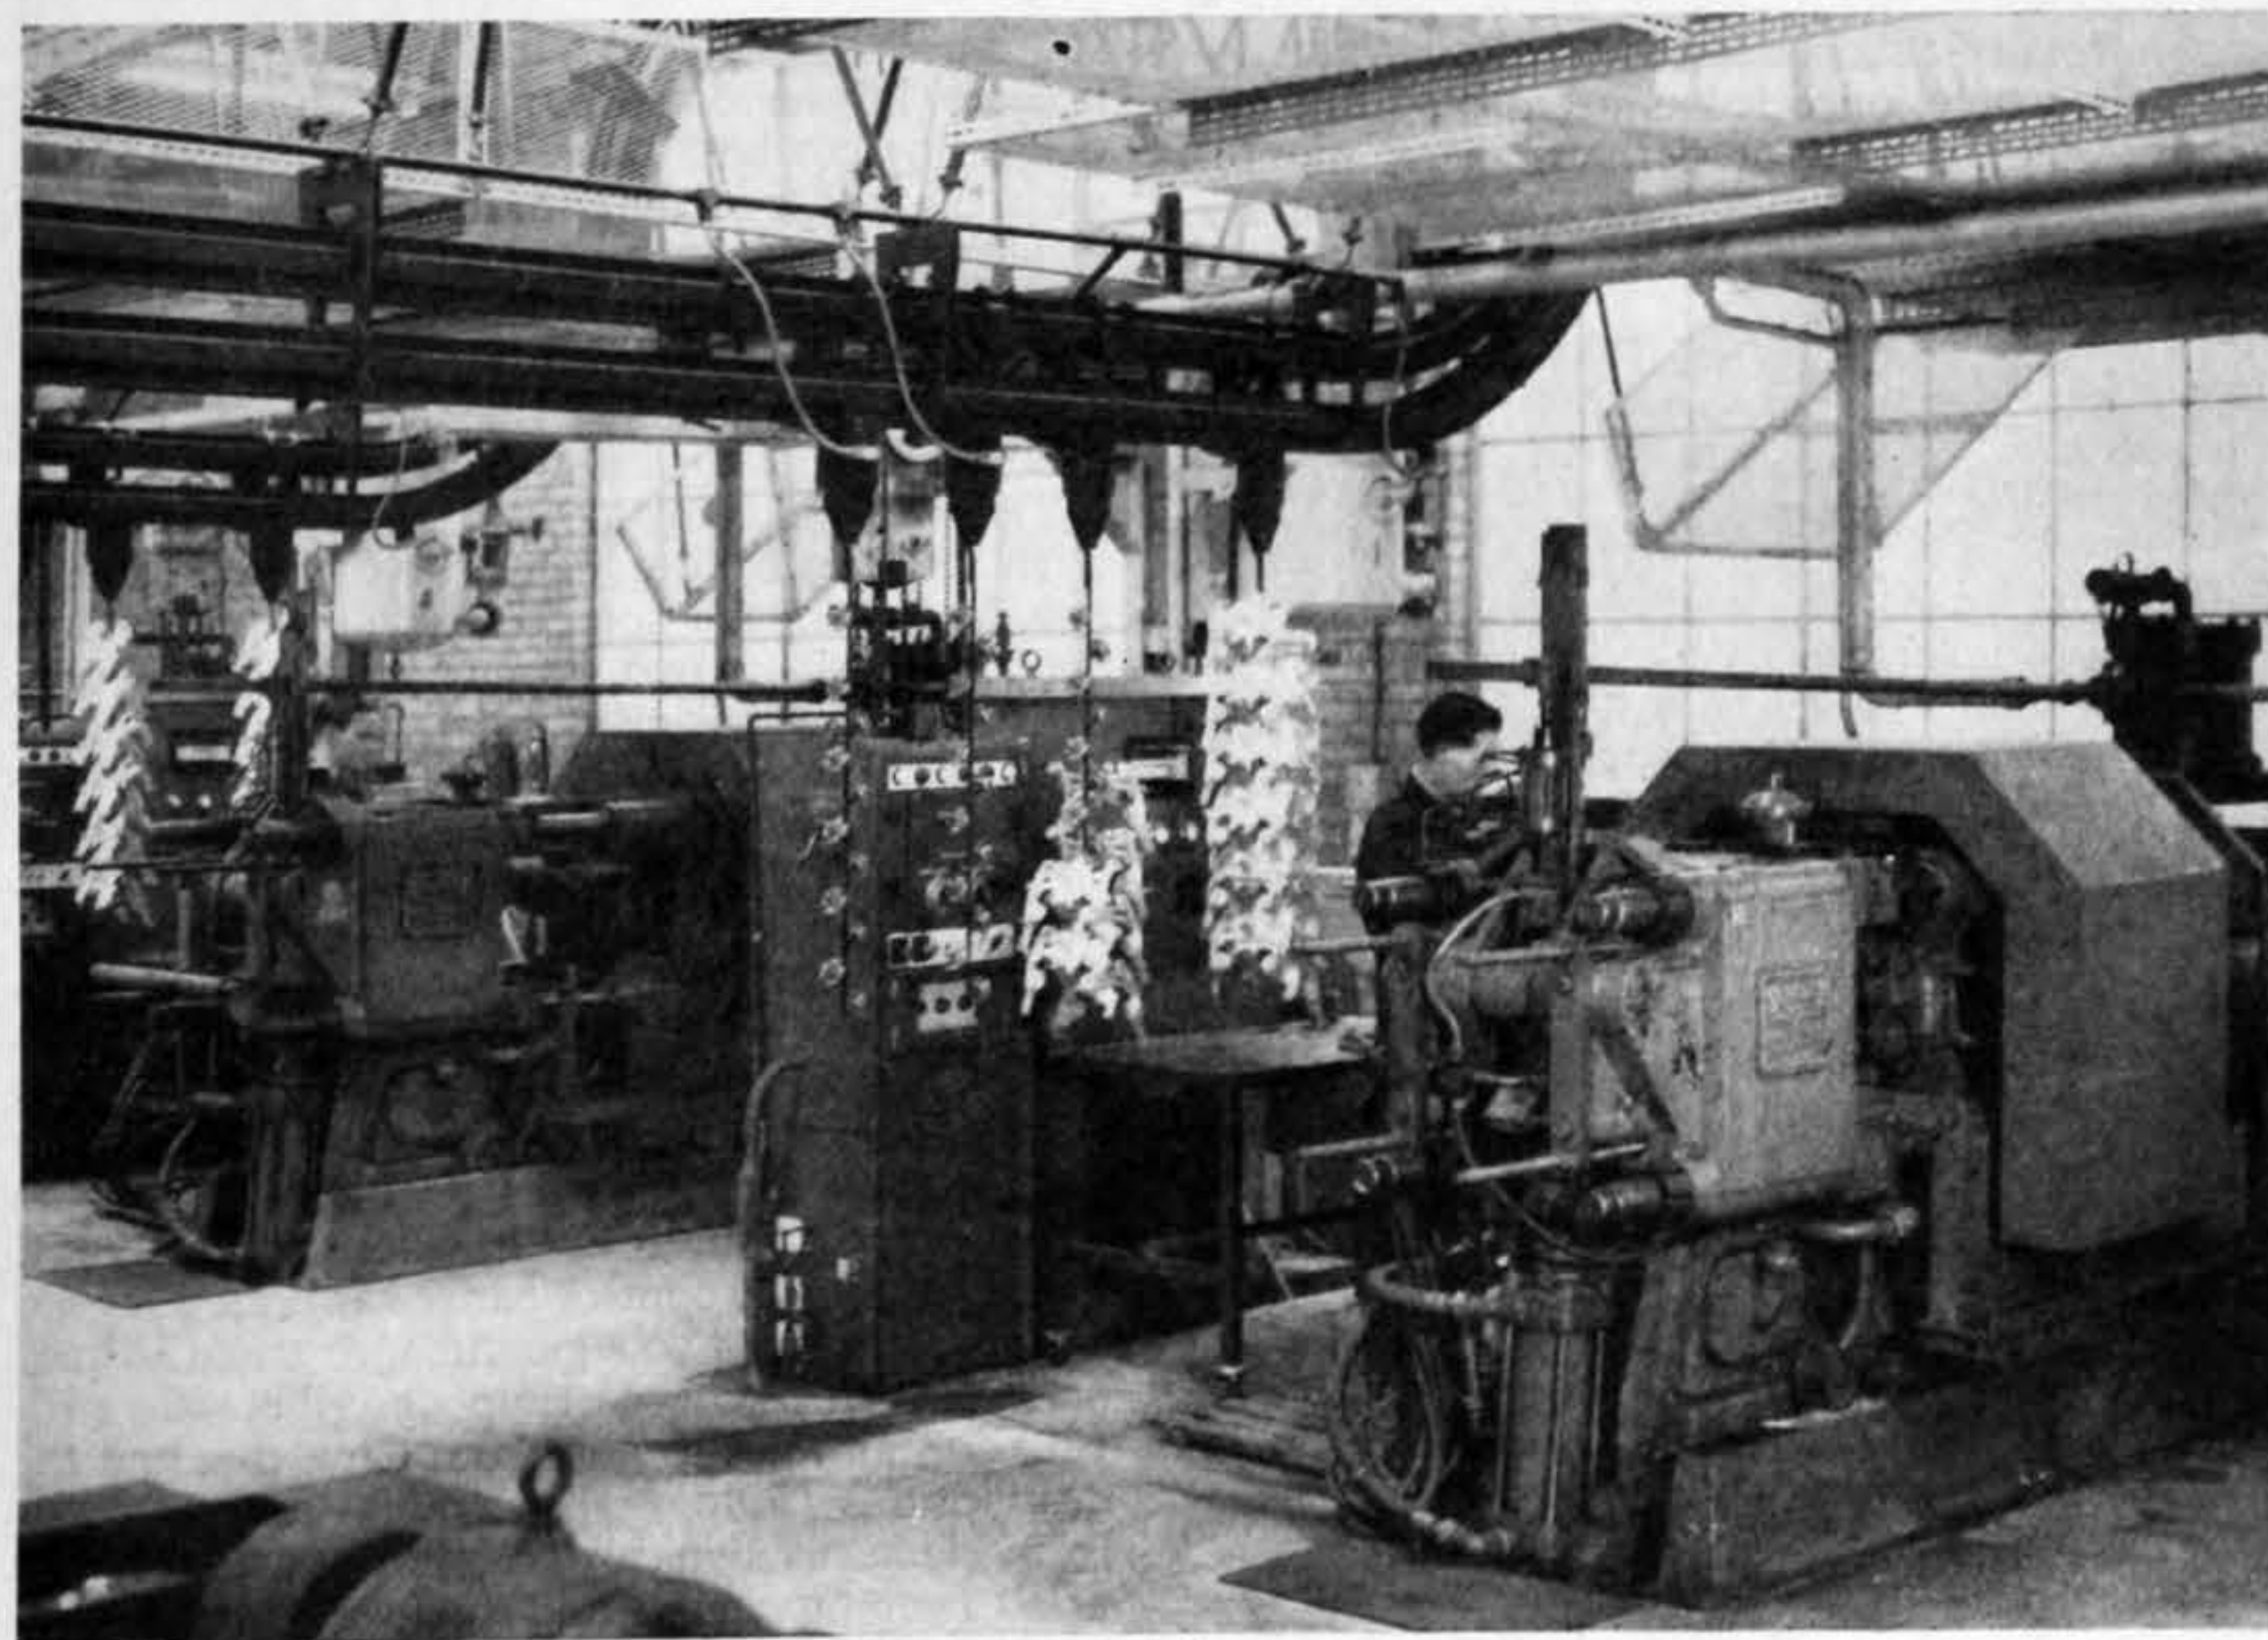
Line of electronically controlled die castings machines. As castings are produced on these machines they are suspended on overhead conveyors for transfer to the trimming lines
